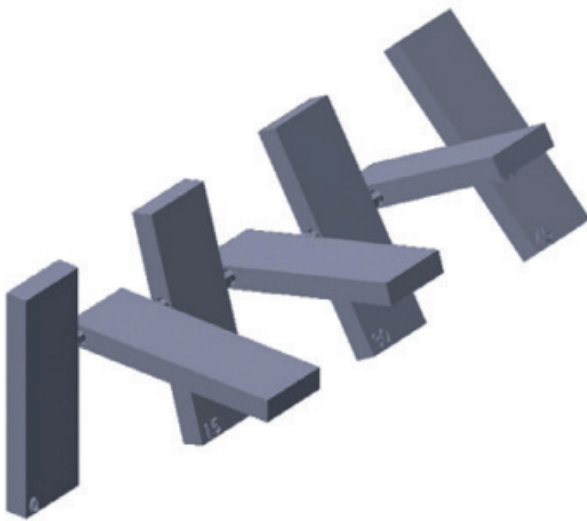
Angle patterns of tiles suspended on a cylinder [37]
